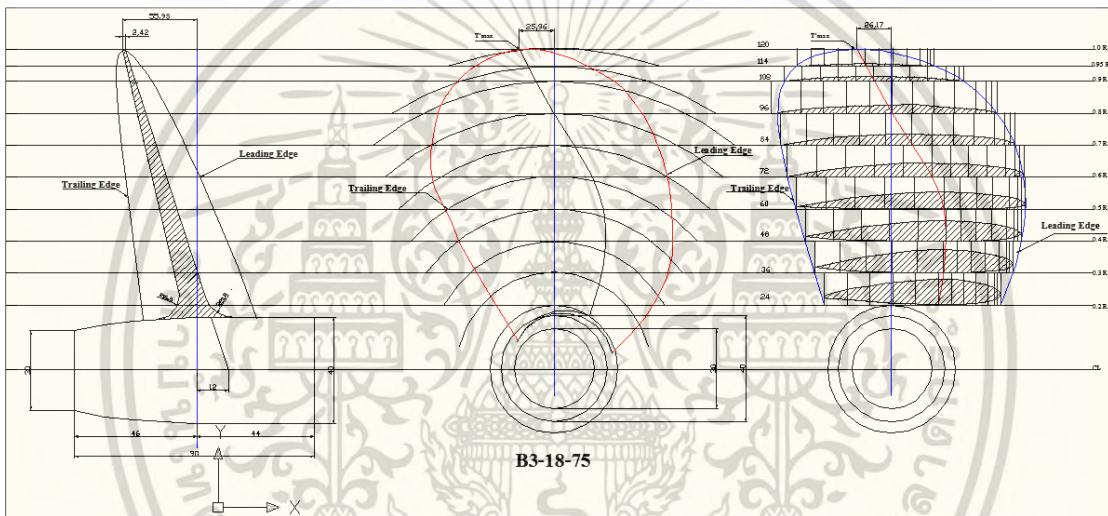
Drawing Type 3 Blades, 18° Skew Angle, 75 Developed Area (New Design, Model-A)
